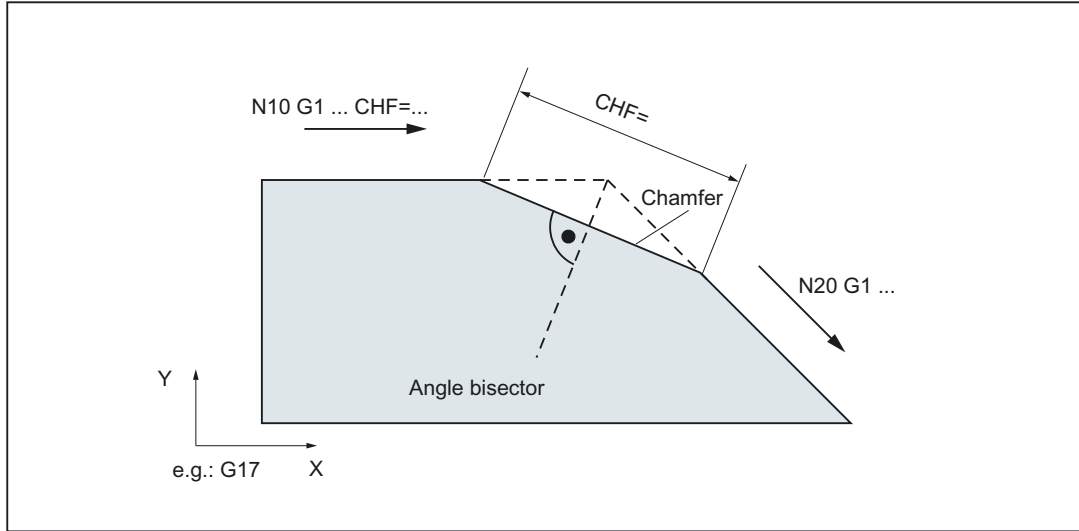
Inserting a chamfer with CHF using the example: Between two straight lines
